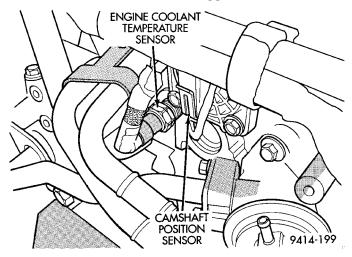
Engine Coolant Temperature Sensor—SOHC DOHC
